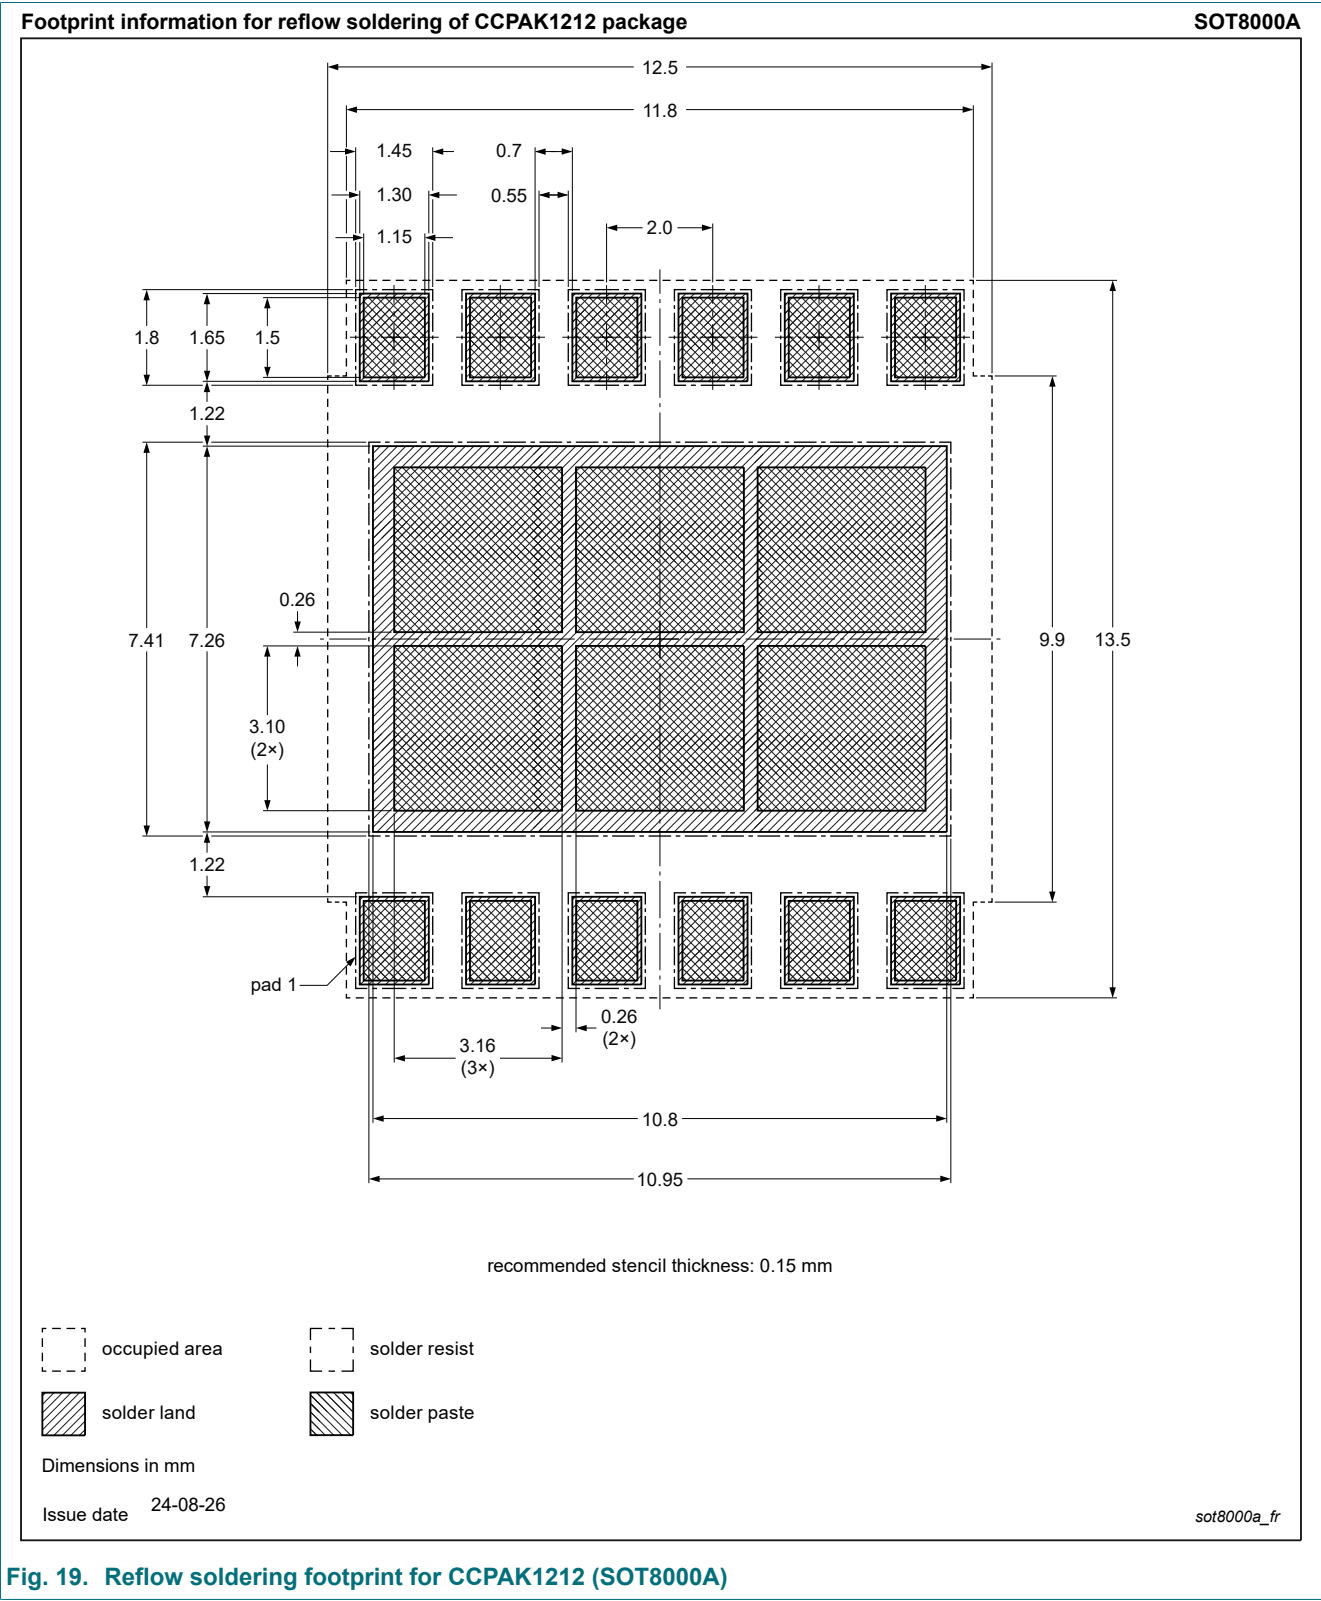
Reflow soldering footprint for CCPAK1212 (SOT8000A)
